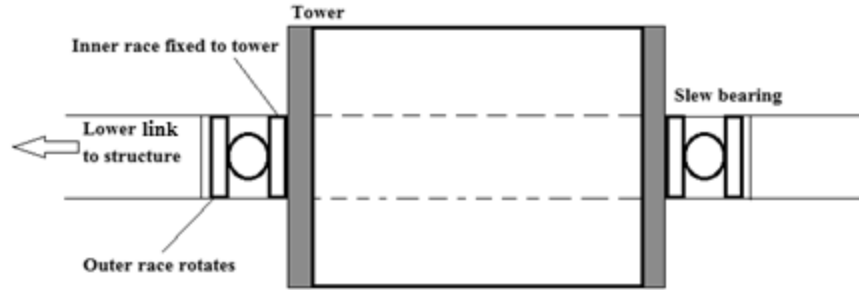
Second yaw bearing (slew bearing) fitted to tower
